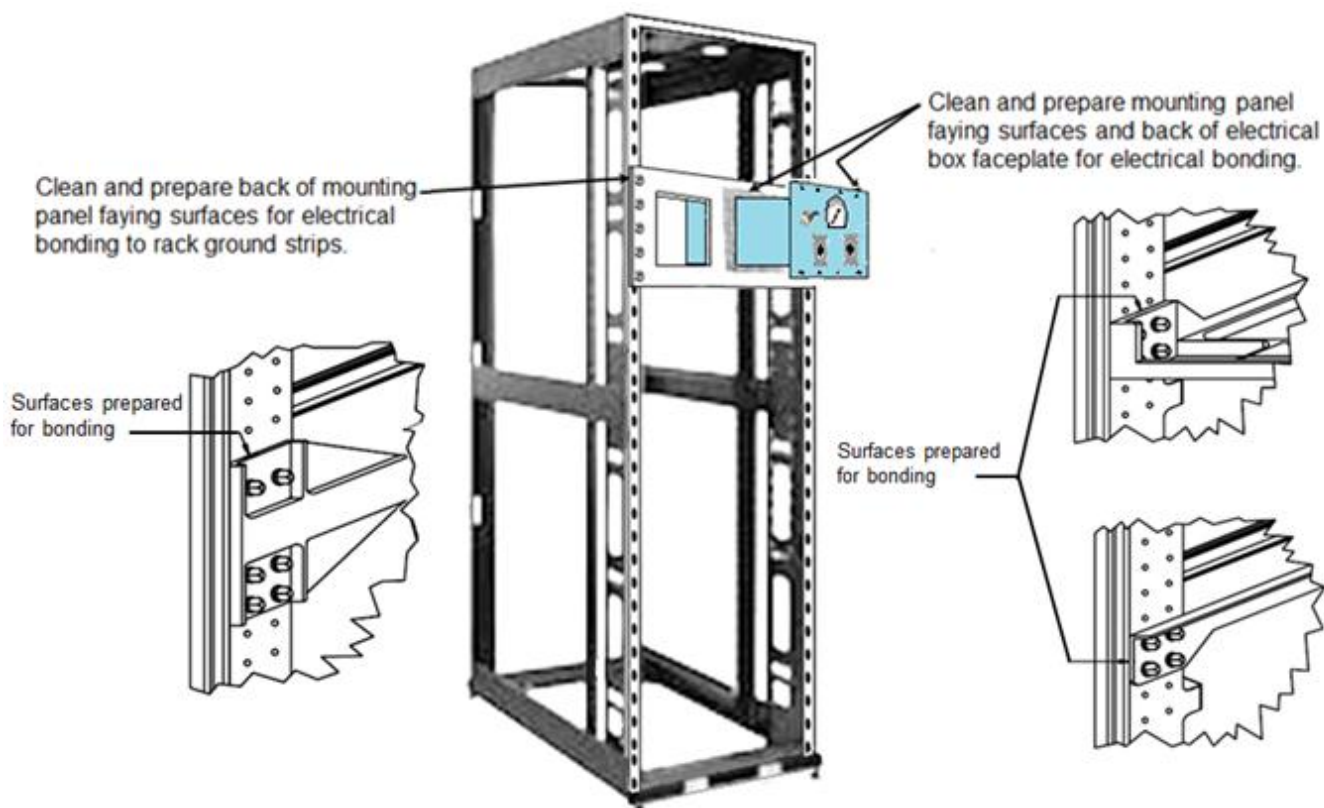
Generic Equipment Rack with Vertical and Horizontal Braces for Attaching Secondary Structure
